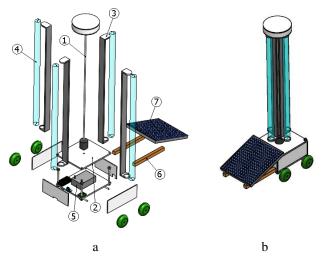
Schematic view of the UV-C disinfecting mobile unit. a) Assembling guide, (b) Isometric view
